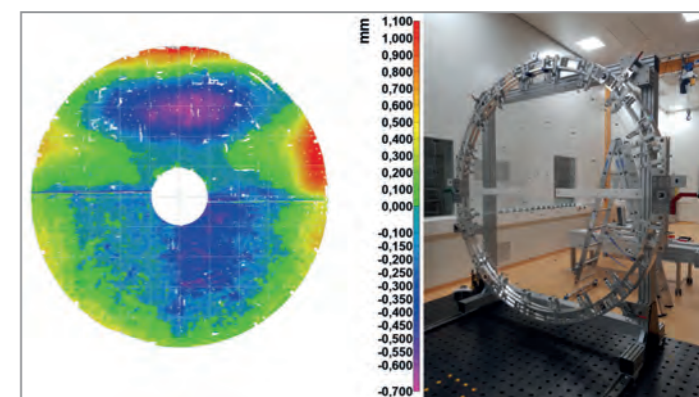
Left: Laser scan of the first disk assembled using Dee prototypes. Right: First DD assembly using acrylic dummy Dees.
